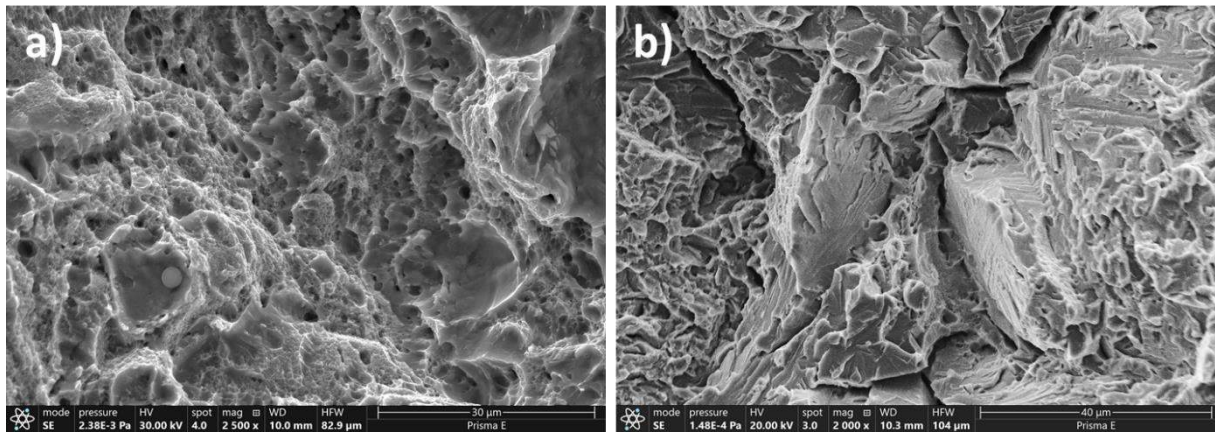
SEM of the fracture surfaces of 1.4542 manufactured by powder bed fusion and examined with charpy impact tests a) in the as-printed state with 50 J and ductile fracture b) after aging at 480 °C for 1 h with 3 J and brittle fracture
